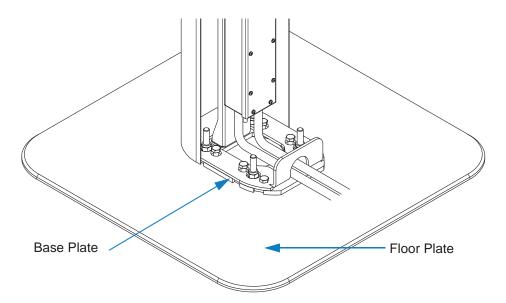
Floor Plate for Adhesive Option (Sectional View of Column)
